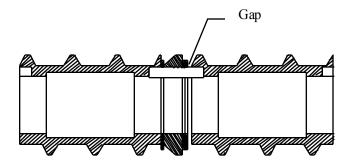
Example of too few CHOKE PLATE SPACERS
